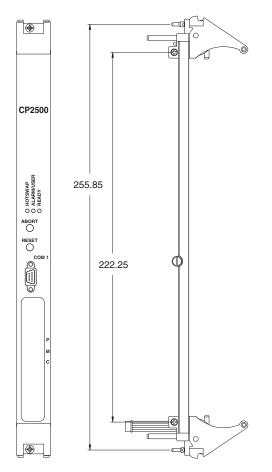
Physical Dimensions of the Netra CP2500 Front Panel
